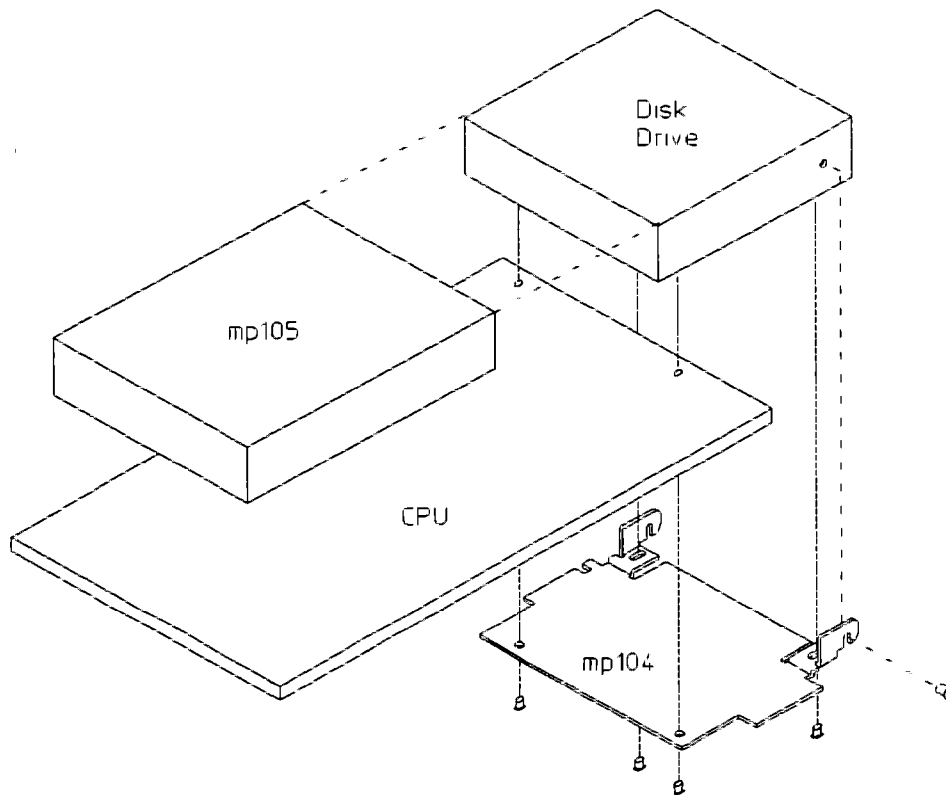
Reference Designators for Assembly Covers and Brackets
